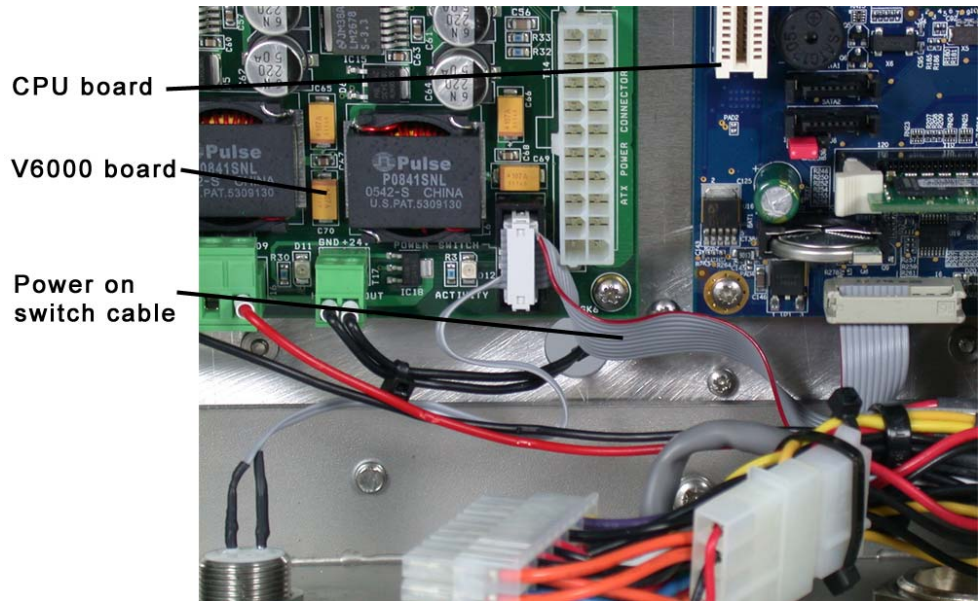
M6000 Controller, power-on switch cable connection between the V6000 board and the CPU board.
